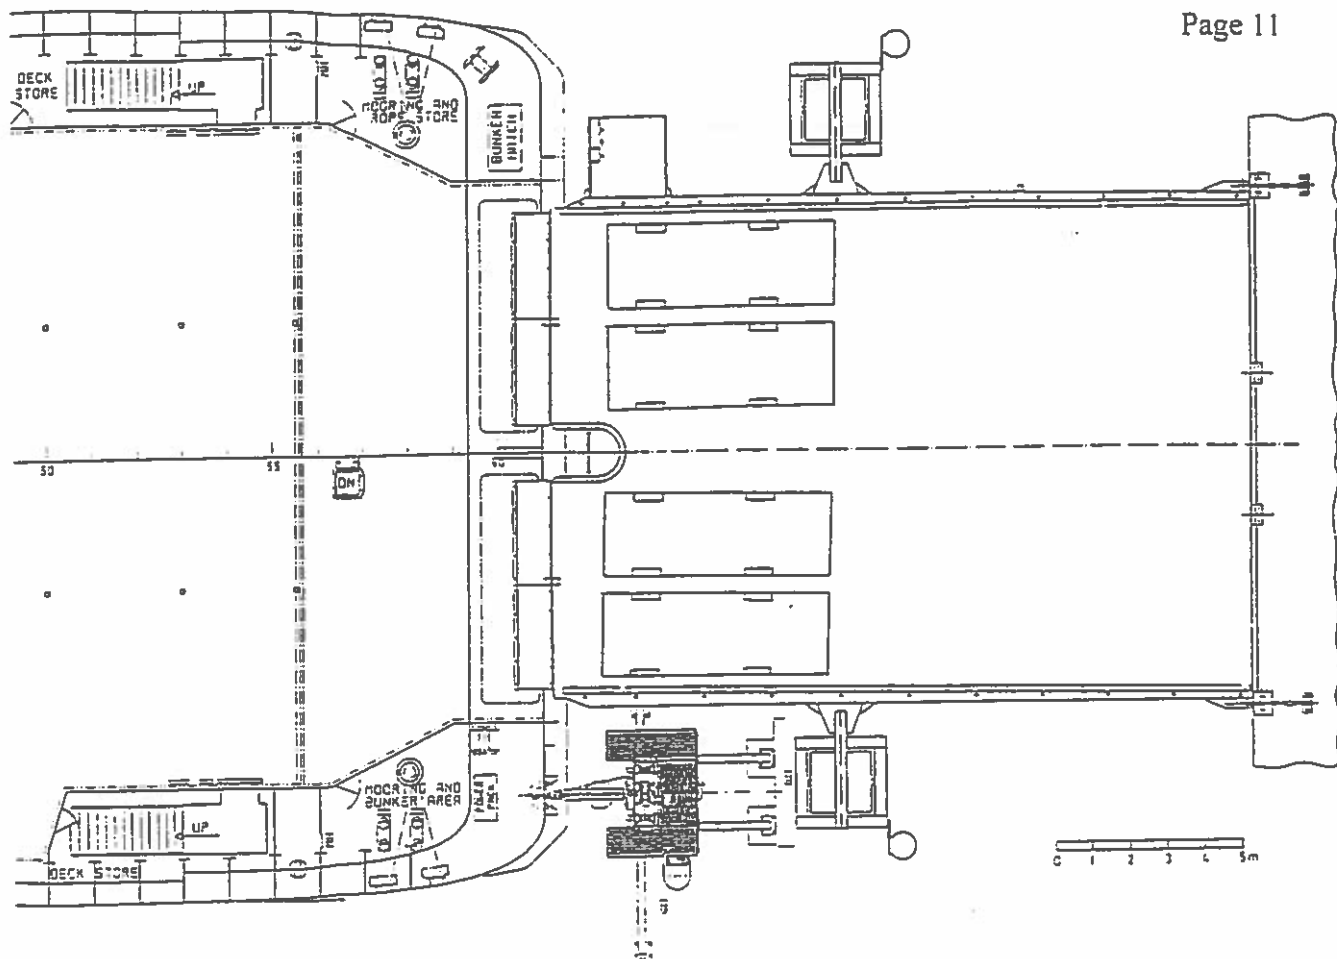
Bow Ramp and Automatic Mooring, Plan View
